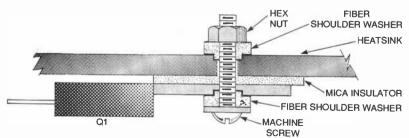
MOSFET Q1 must be mounted to the heatsink as shown here.
